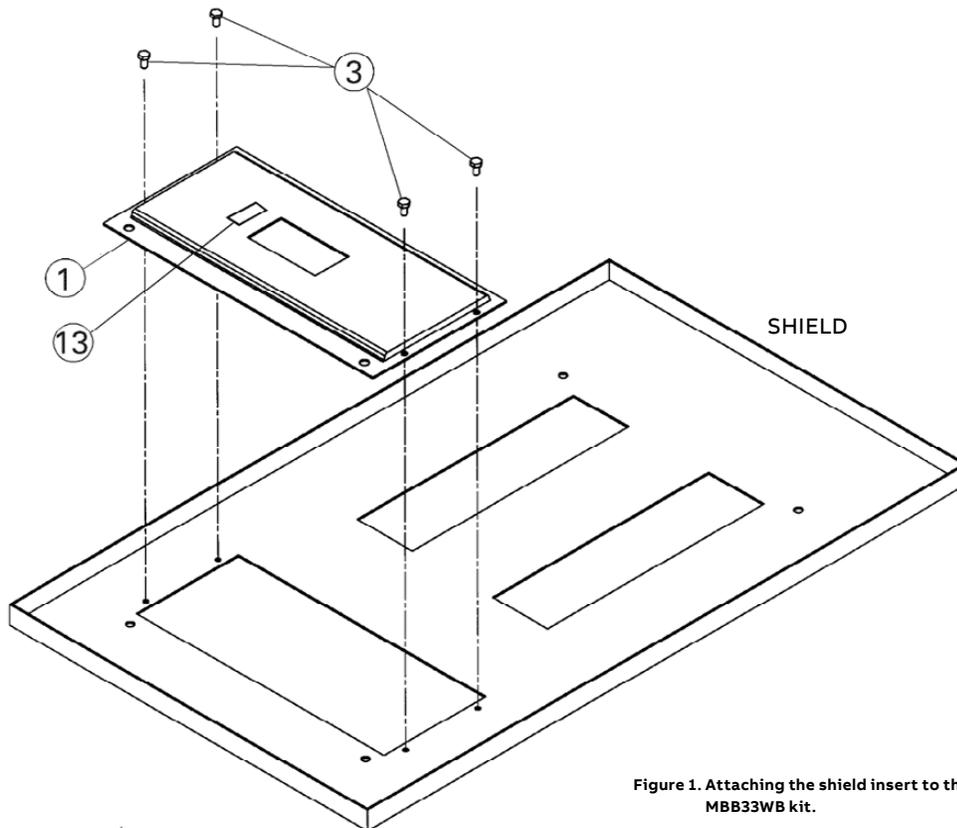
Attaching the shield insert to the shield for installation of an MBB33 or MBB33WB kit.
